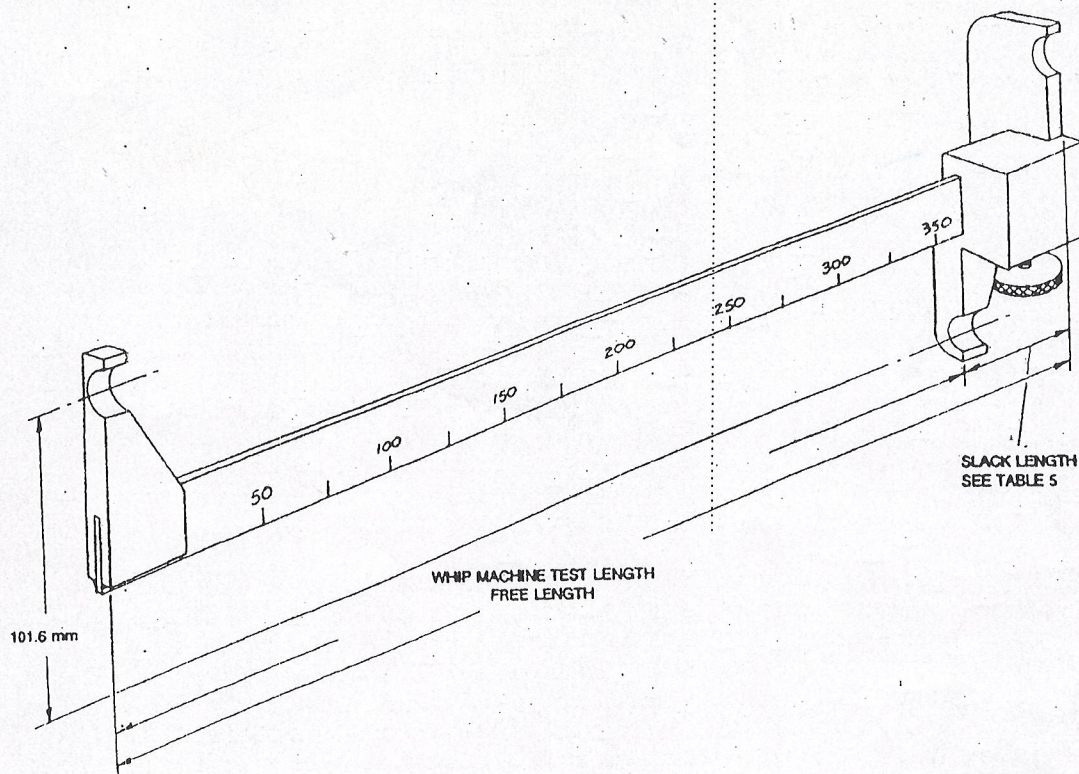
TYPICAL WHIP TEST SLACK SETTING FIXTURE
